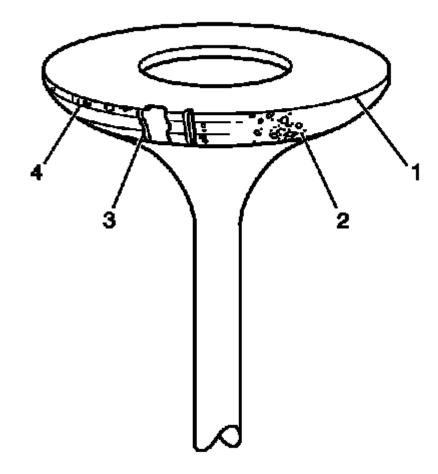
Inspecting Valve Face For Burning, Pitting & Cracking Courtesy of GENERAL MOTORS CORP.
